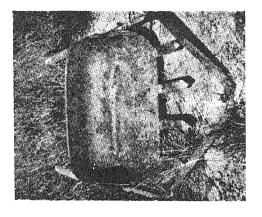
View of scoop from above. showing the position of the bars in relation to the draw-bar. Note welding of edge of scoop to the bars.
